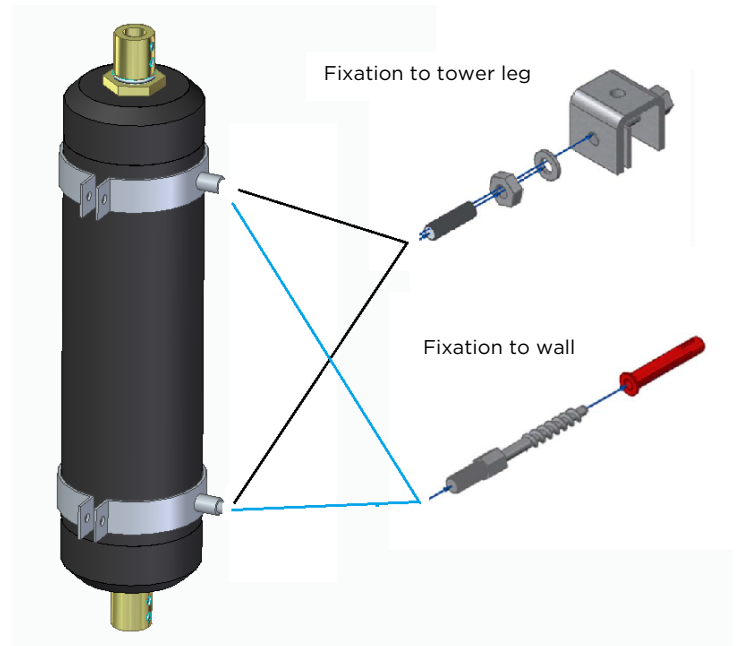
Detail of fixation to leg and wall of the dinfil filter.
